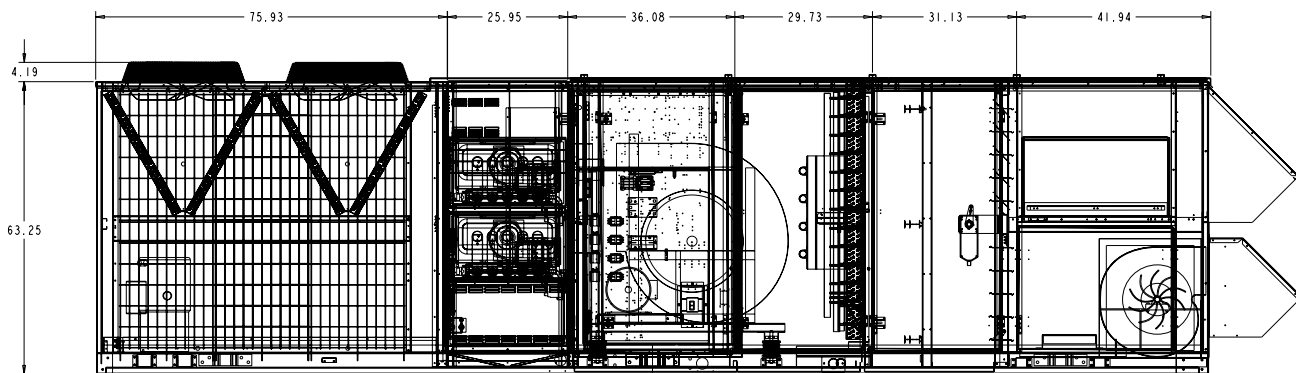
MILLENNIUM MAJOR COMPONENT LAYOUT
